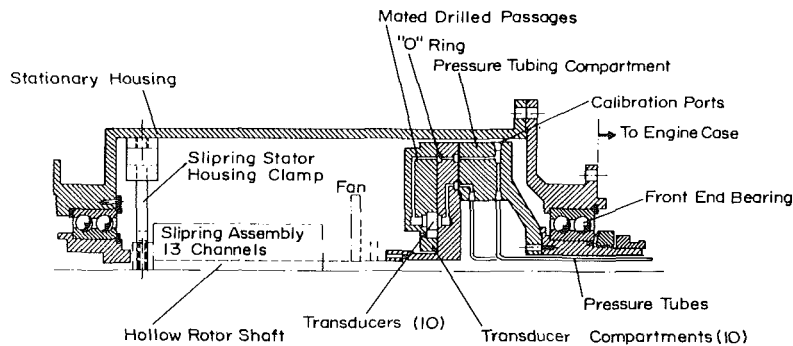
Pressure transfer device-rotating transducer assembly at NASA Lewis Research Center [55, 56]
